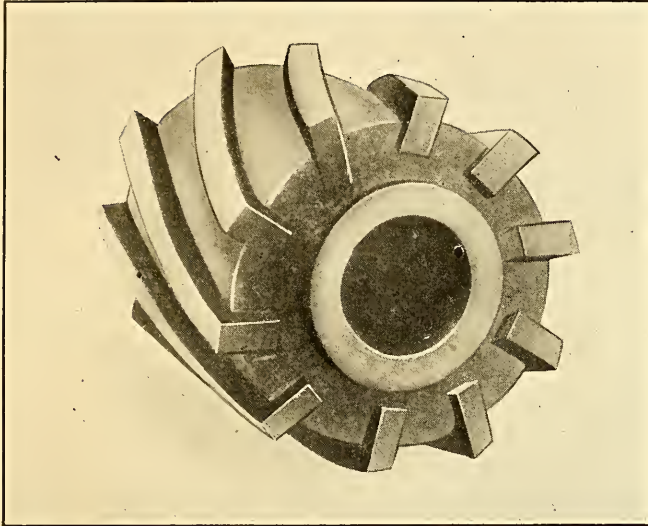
High-Speed Steel Cutters Held in Wax Pattern with Hollow Steel Core
